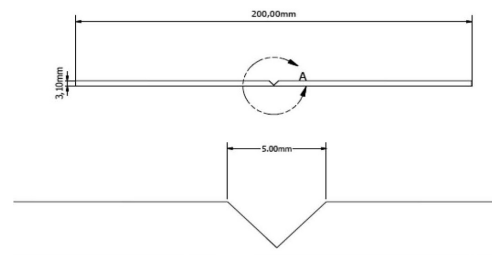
A schematic drawing showing the V-groove machined into the base metal
